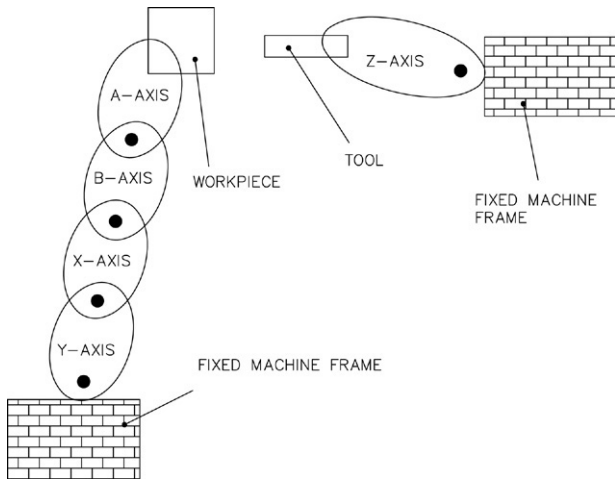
Kinematic link diagram of Maho 600E 5-axis machine.
